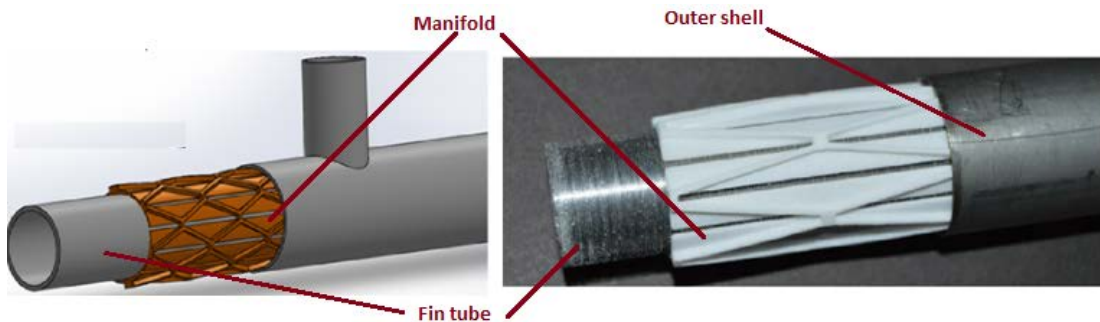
Assembly of the MMHX showing the microchannel tube, manifold and the shell
